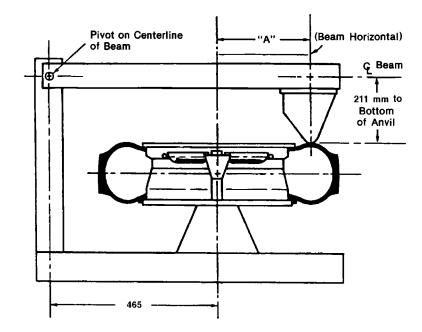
Bead Unseating Fixture All Dimensions in Millimeters (mm)
